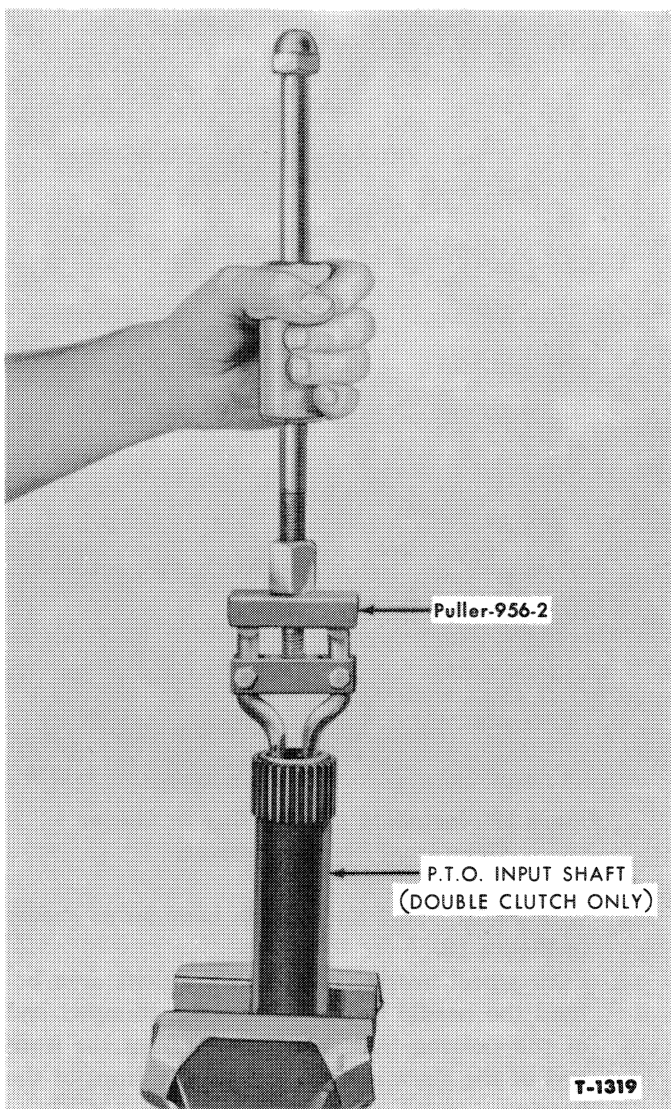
Removing P.T.O. Input Shaft Oil Seal and Needle Bearing
